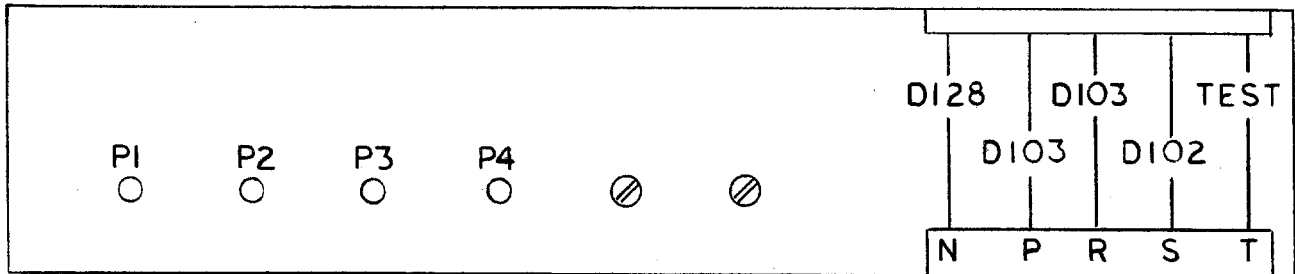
(0227A2036-0) SLC51D OUTLINE AND MOUNTING DIMENSIONS
